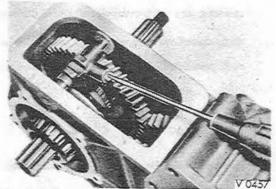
Removing the gear shift fork plug from the high & low fork.
